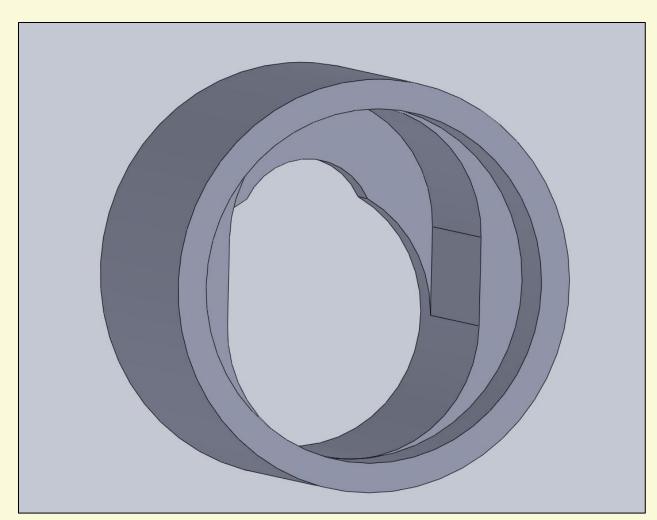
SolidWorks model of final design focused on magnet housing hole.
